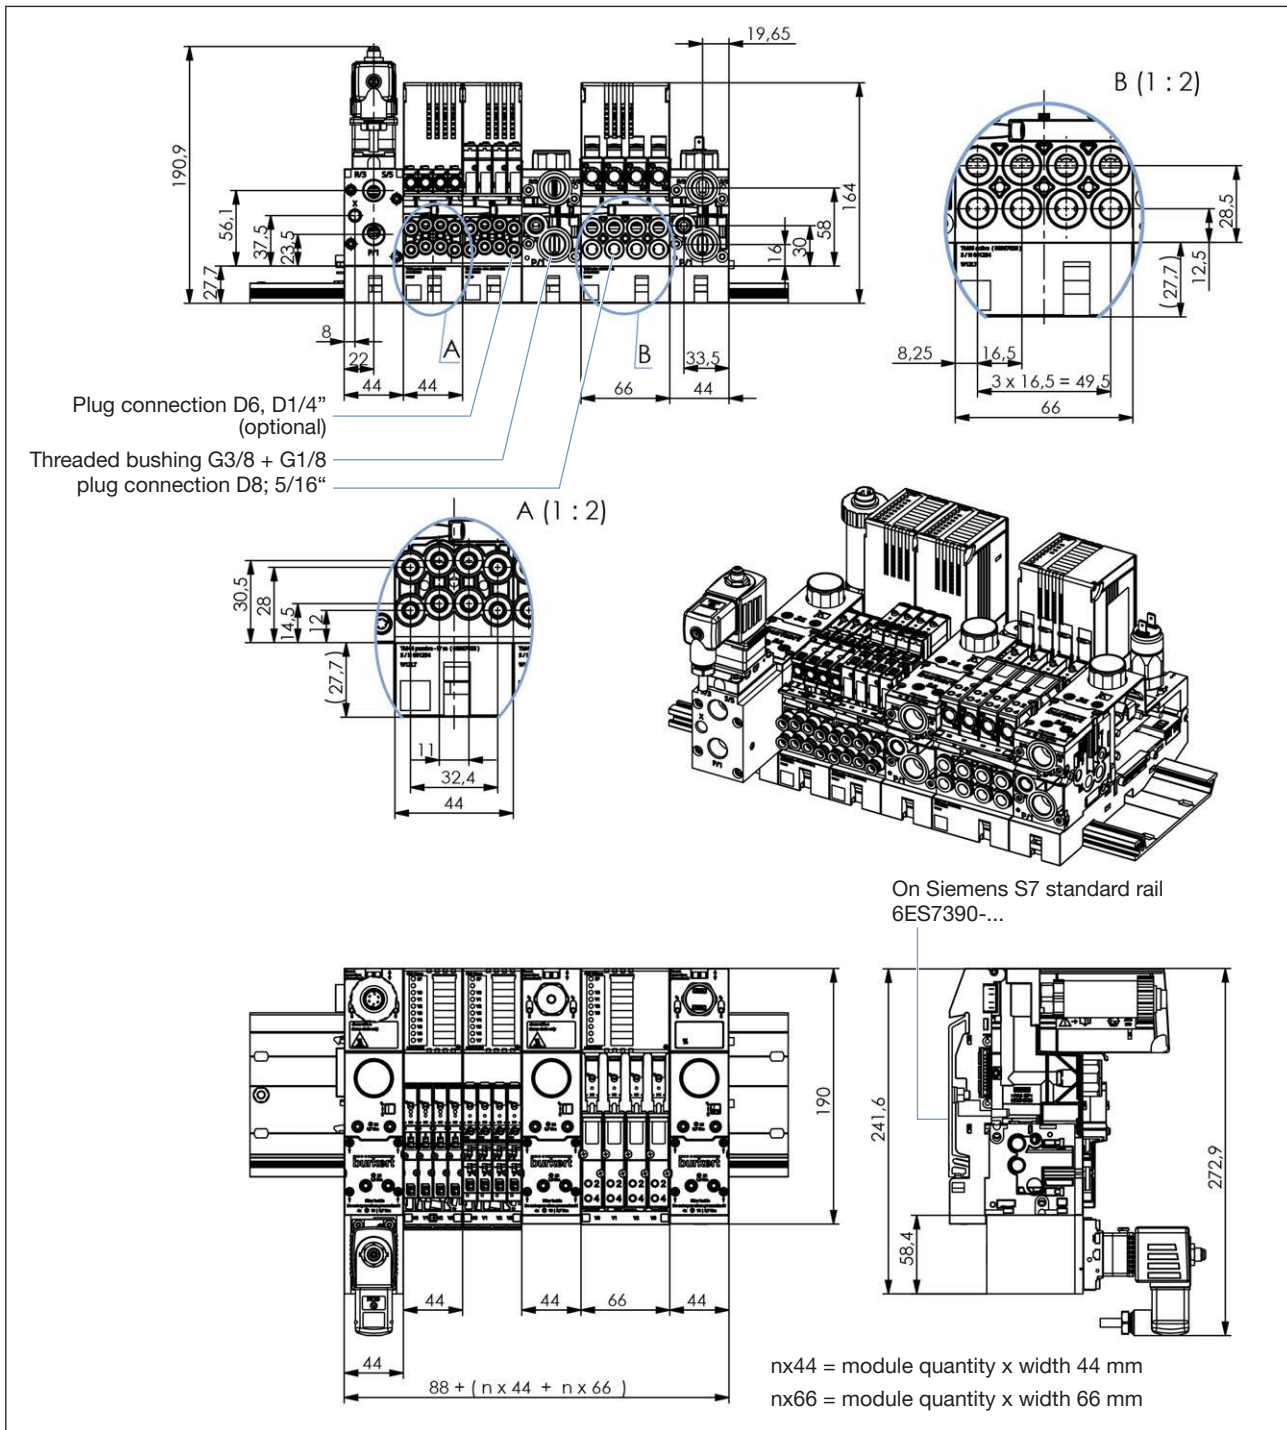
Dimensions [mm] full system Type 8650 REV.2
